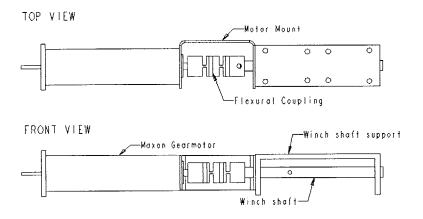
Side and top views of CAD model of Maxon Gearmotor assembly for Puck Depositing Module.
